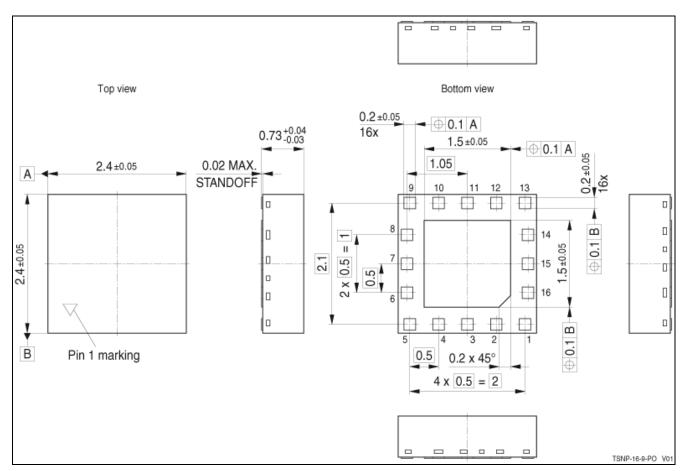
Package Outline (top, side and bottom view) of TSNP-16-9
